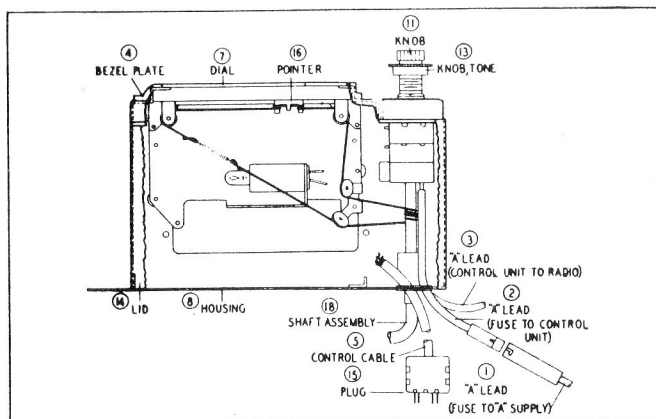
Control Unit C623M (Chrysler), Showing Location of Parts and Dial-Cord Installation Details
